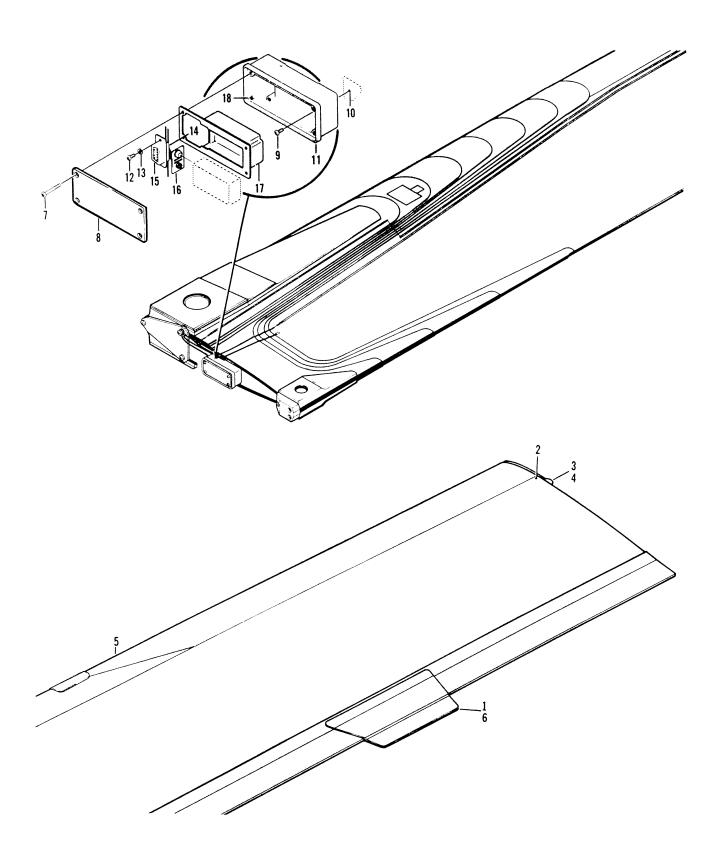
Blade Assembly, Main Rotor, Thin Tip
